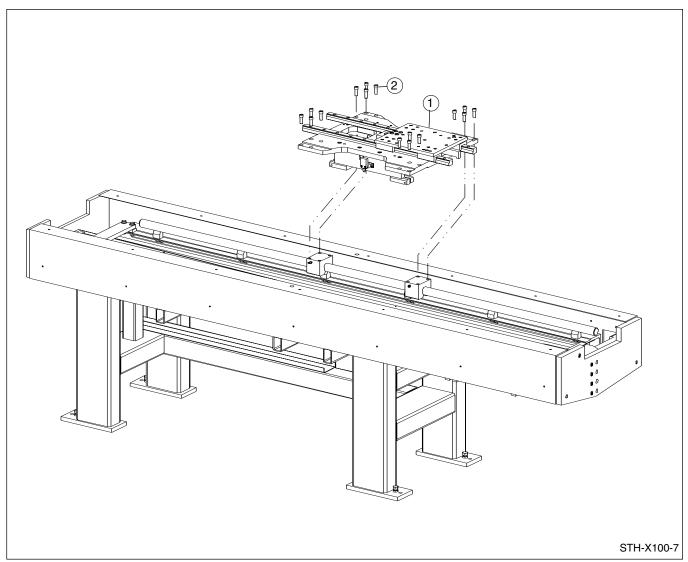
FIGURE A - TUBE HONE MACHINE BASE ASSEMBLY (7 of 8)
